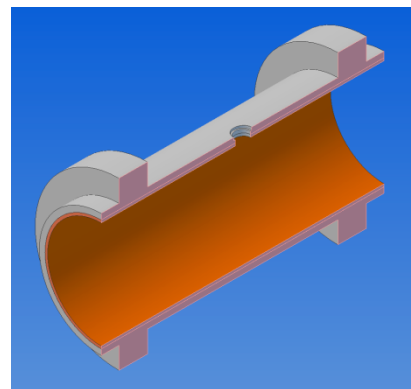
Explosion bonded copper outer conductor, compression rings, and vacuum tube assembly.
